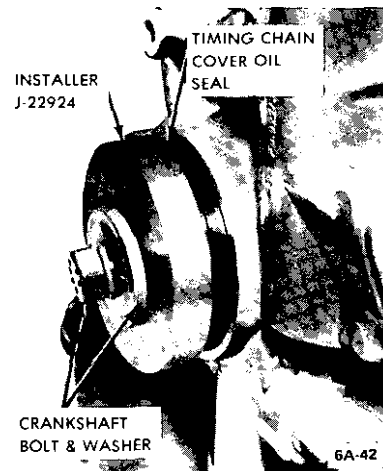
A-42 Installing Timing Chain Cover Oil Seal
